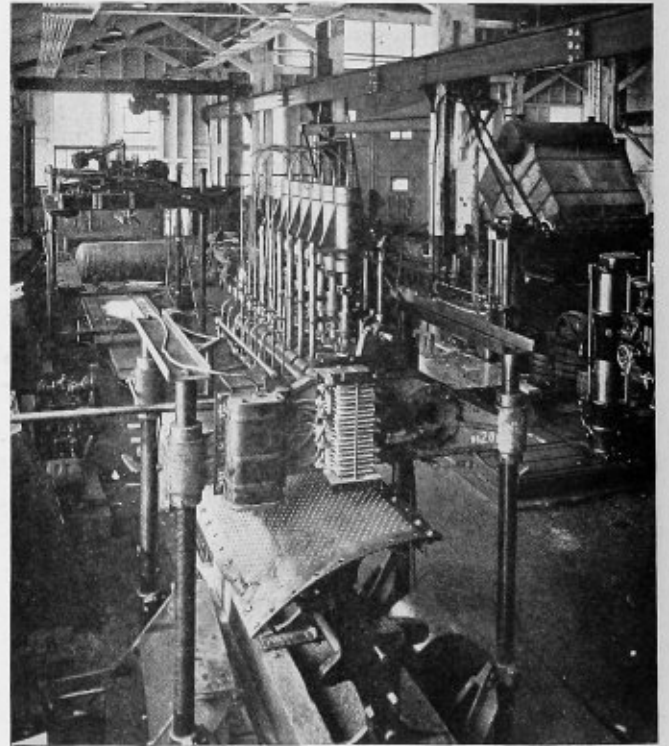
Special Hydraulically Controlled Feed and Table Travel, Six-Spindle Rivet Hole Drill Press
